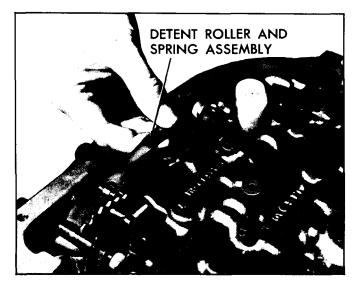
E-211 Installing Detent Roller and Spring Assembly
